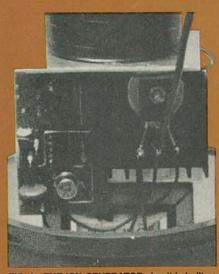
THE ION-GENERATOR circuit is built on a small piece of circuit board. Transistor Q2 is mounted next to the board and should be heatsinked as shown.
